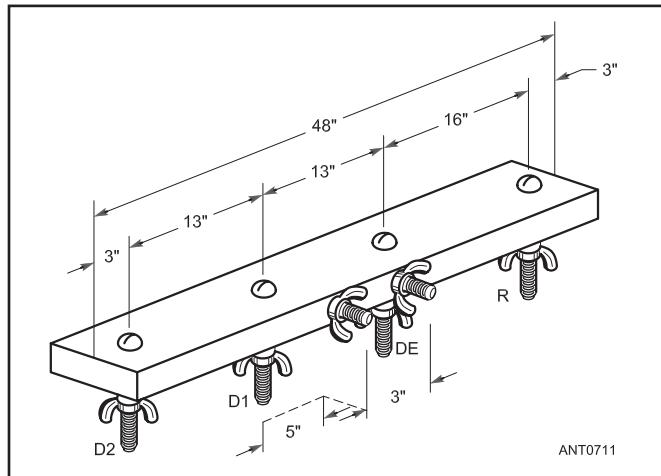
Detail of the boom showing hole center locations and boom to mast connection points.
